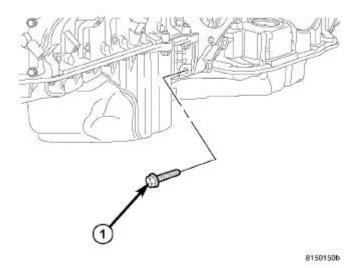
OIL PAN TO TRANSMISSION BOLT
